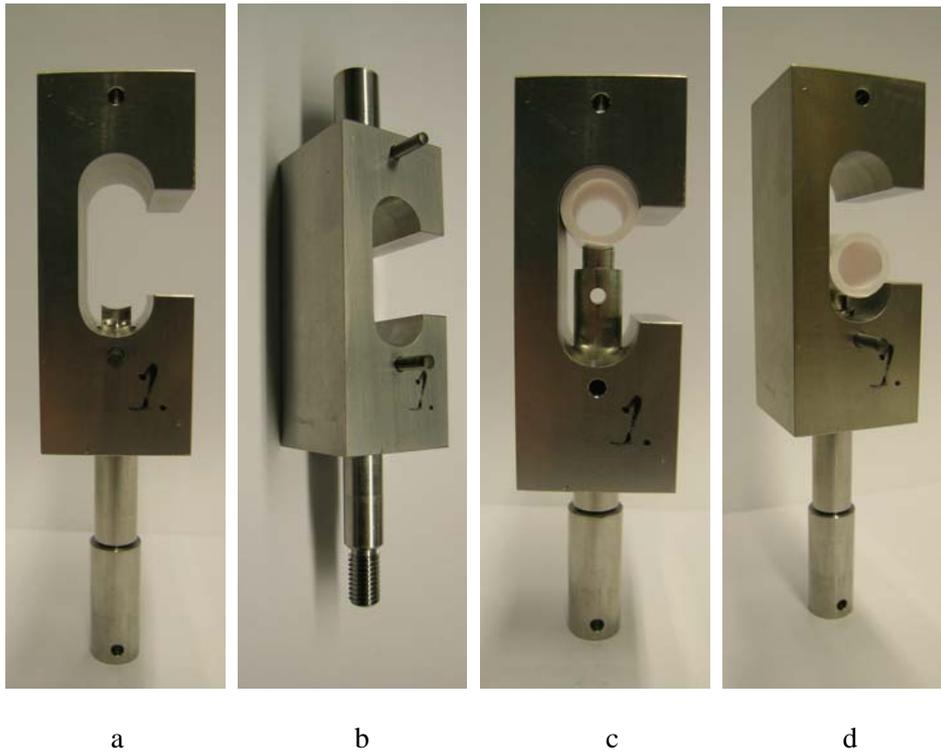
Test tool and holder for tensile testing of tubular samples
